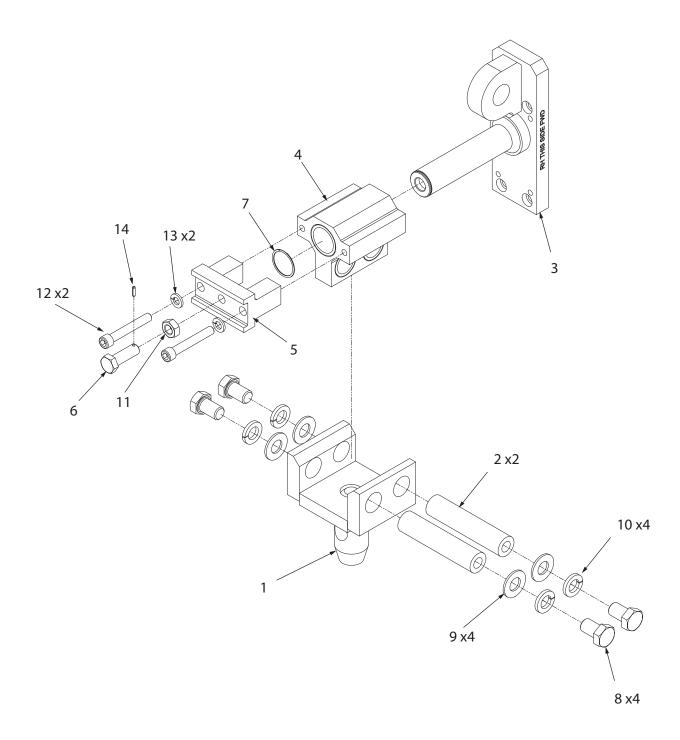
AGSE-E25960-S02 Adjustable FWD Mount Assembly (RH)
